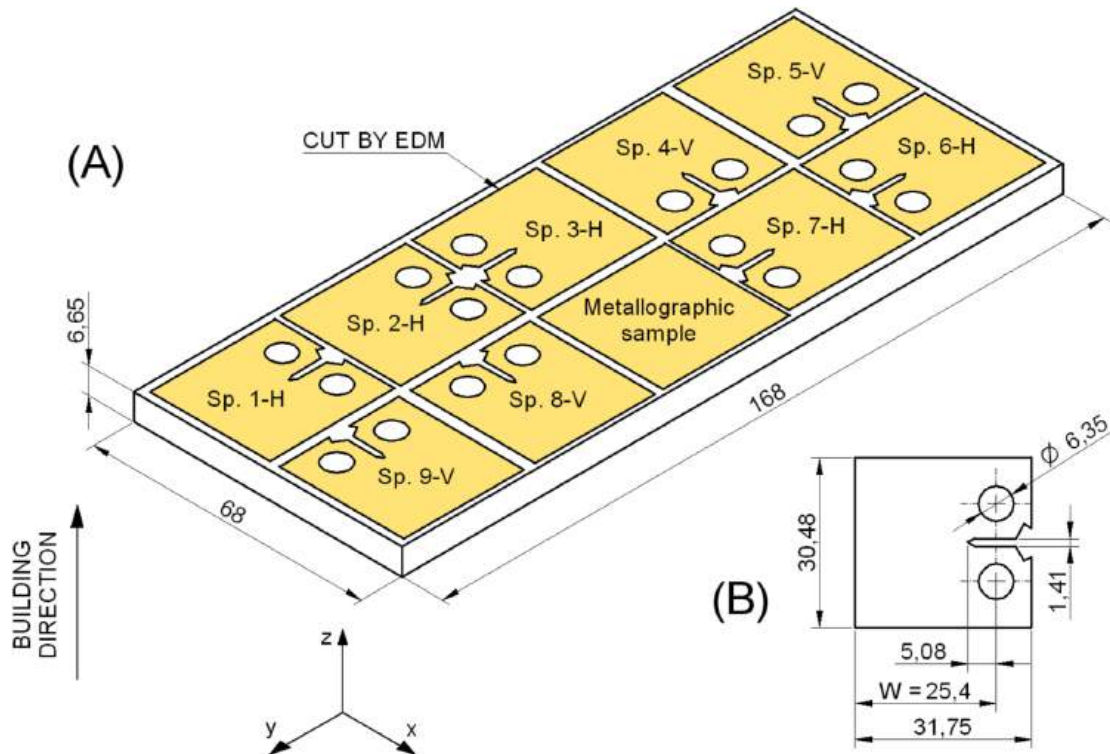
(A) Milled printed plate with the main dimensions and the position of the specimens, (B) dimensions of specimens.
